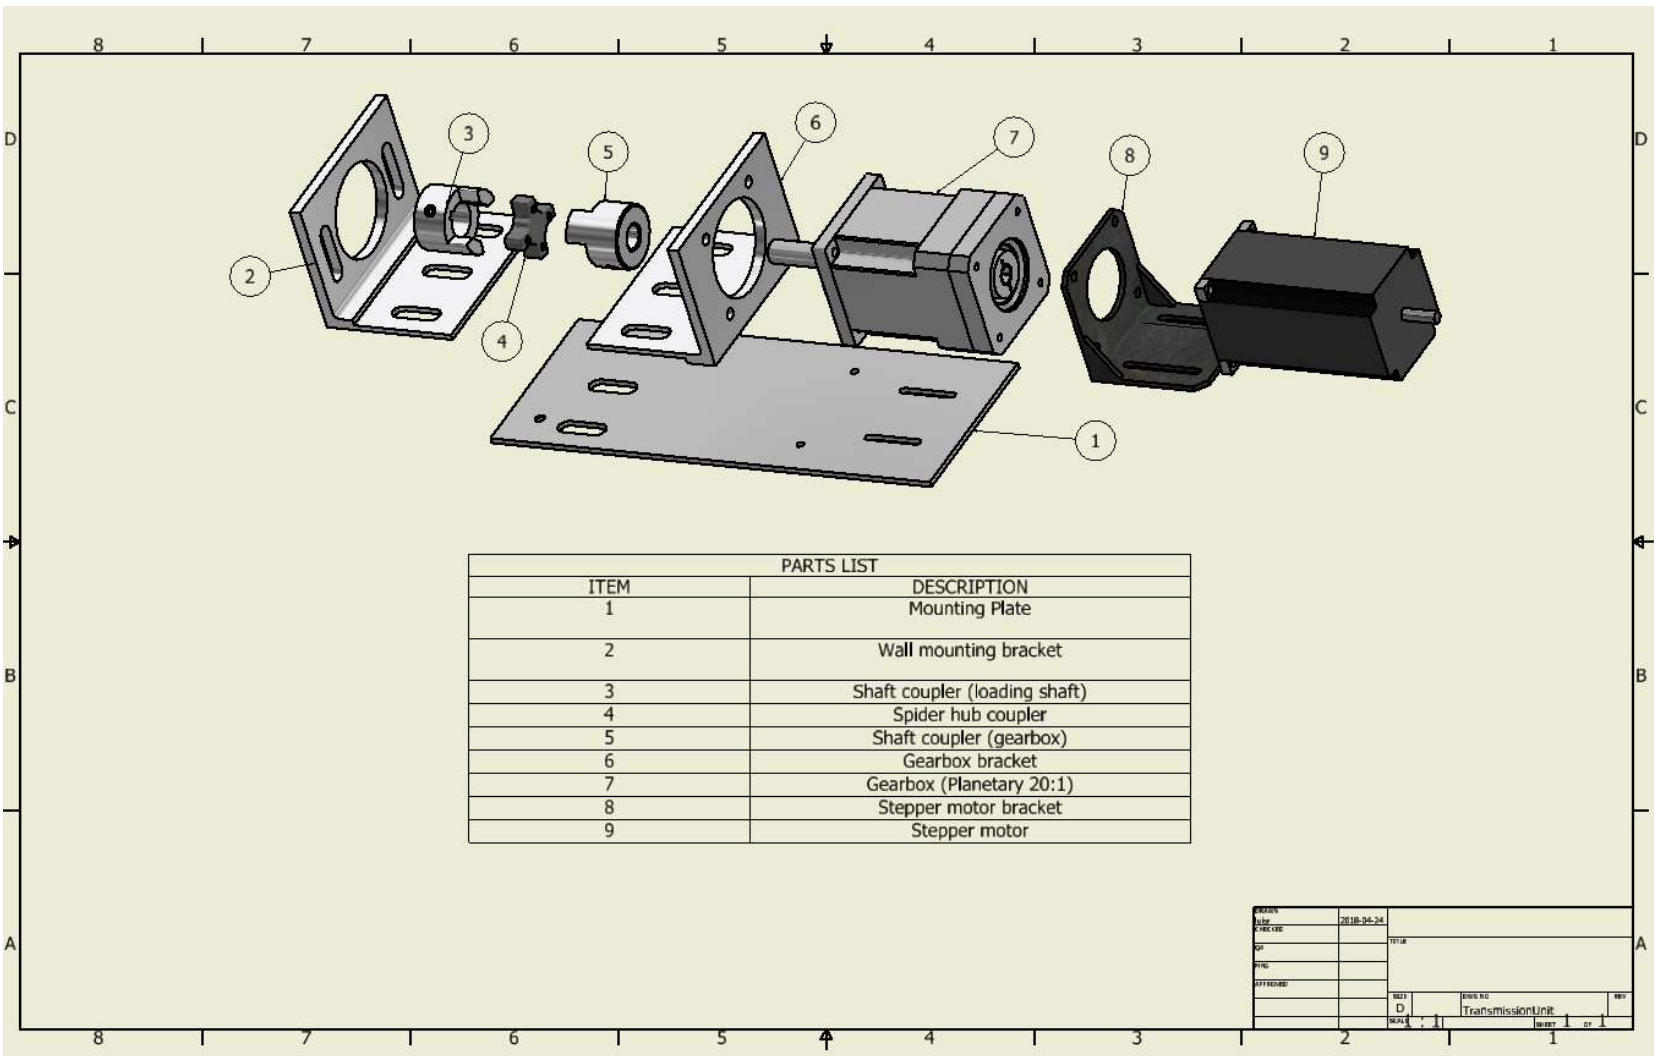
Transmission unit assembly. the image shows an exploited view of the components of the assembly.
